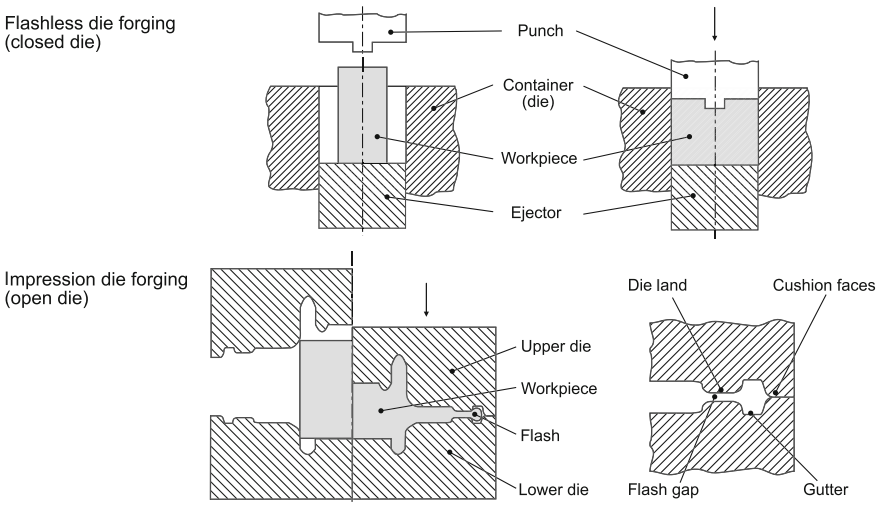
Closed-die forging processes with a completely enclosed workpiece
